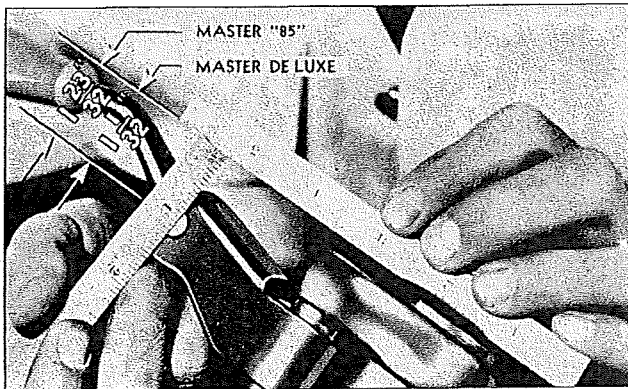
Chevrolet 1939. Gearshift Lever Adjustment
